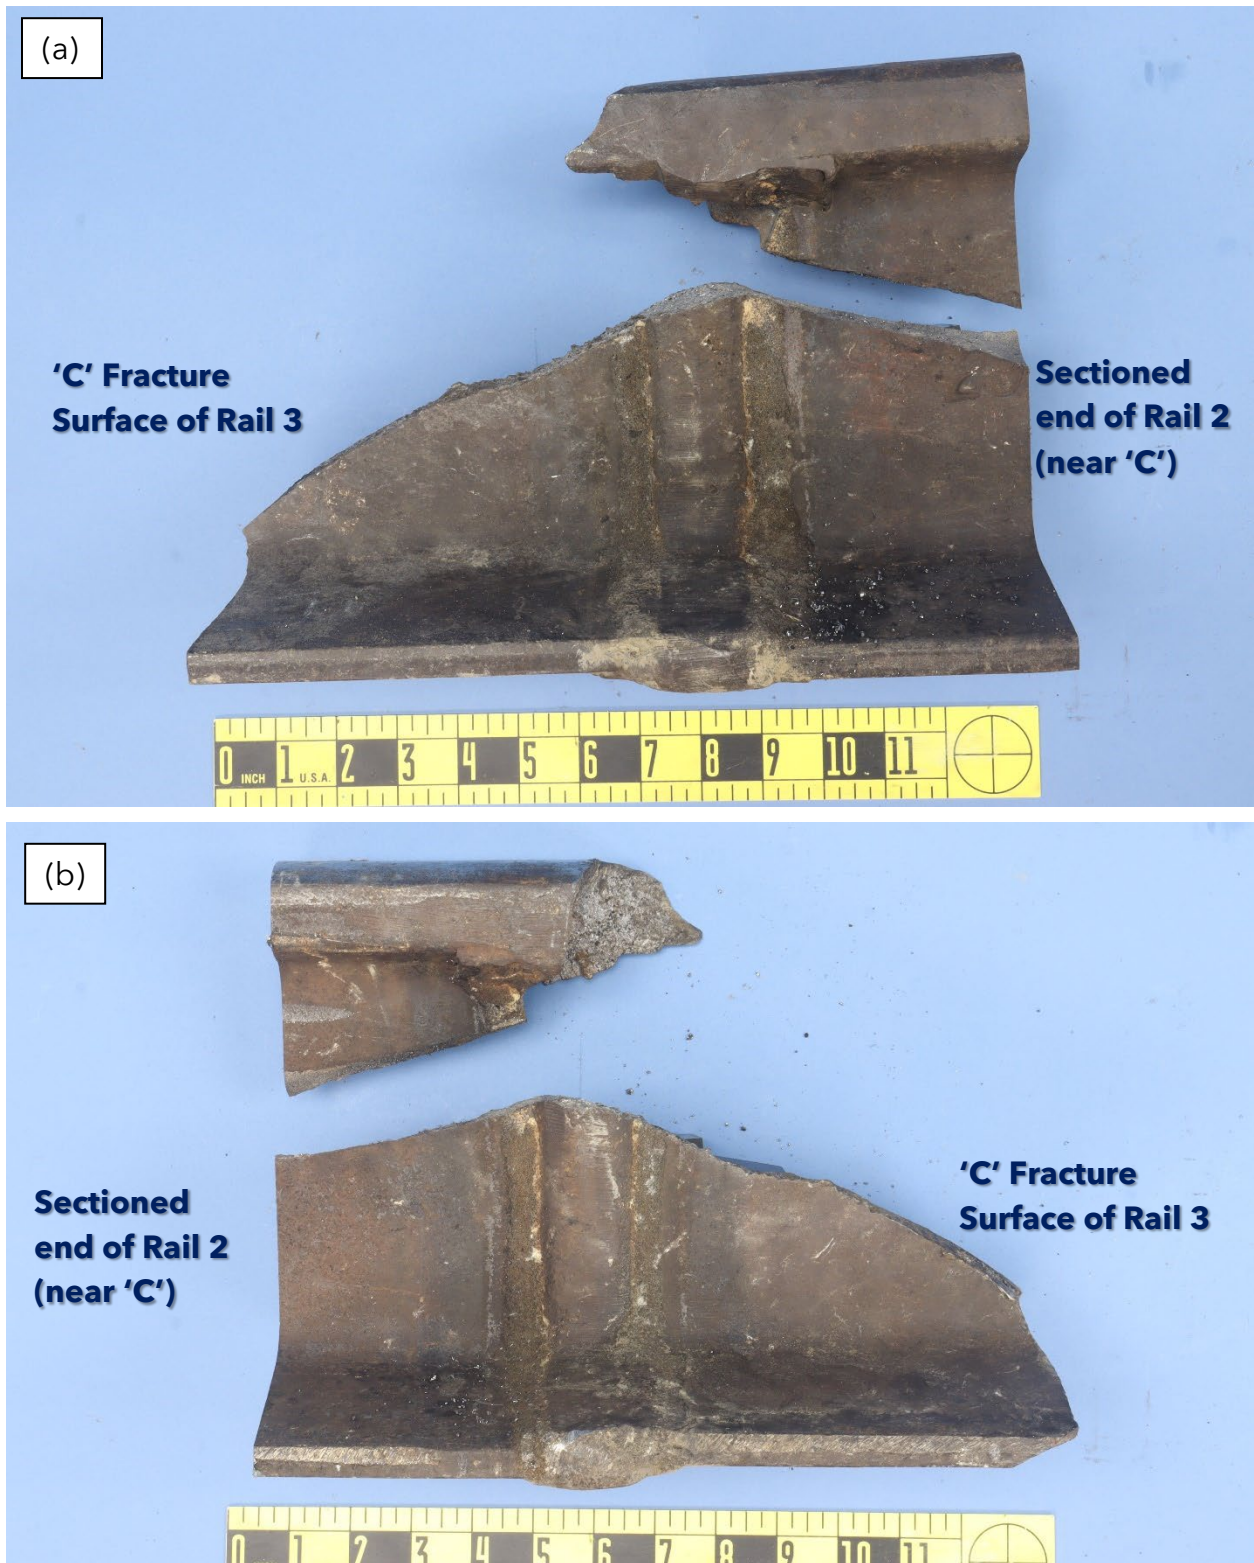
View of the sectioned fractured end of Rail C at the weld with Rail B, from (a) the gage side and (b) the field side.
